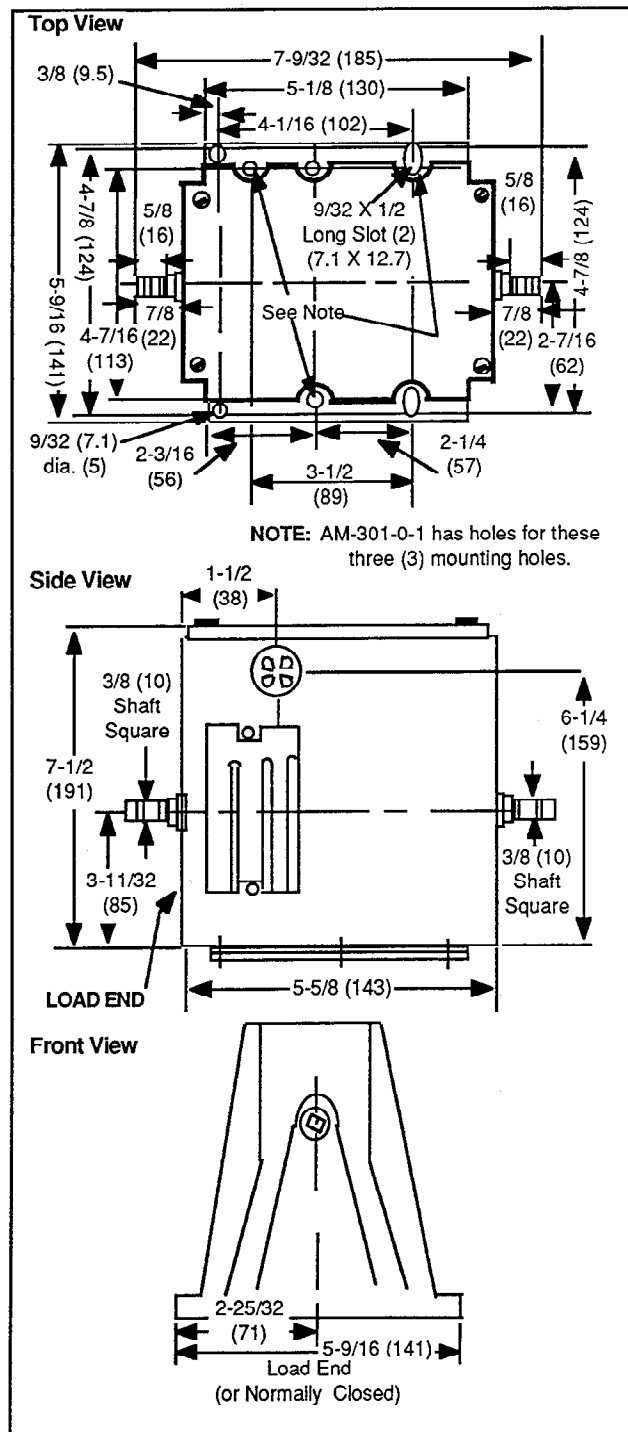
Mounting Dimensions for MMR-400, MMR-500 Series
